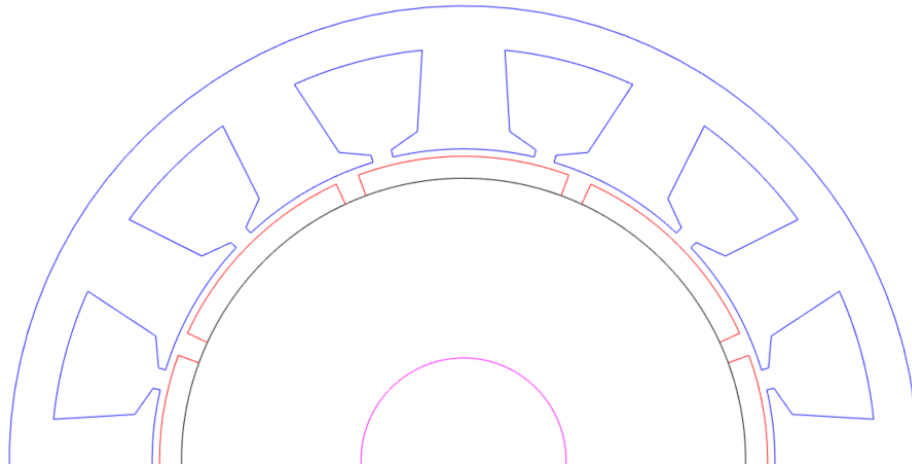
Sketch of the 12s8p stator and rotor geometry.
